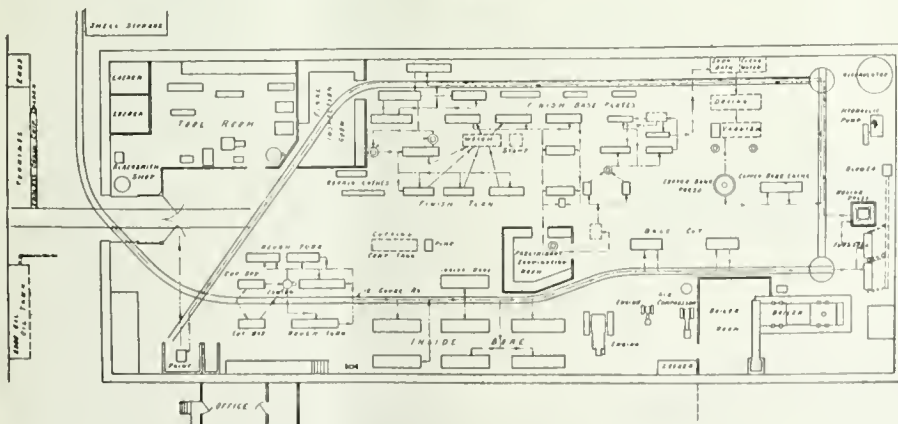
MACHINE LAYOUT OF 4.5 INS. SHELL SHOP.
